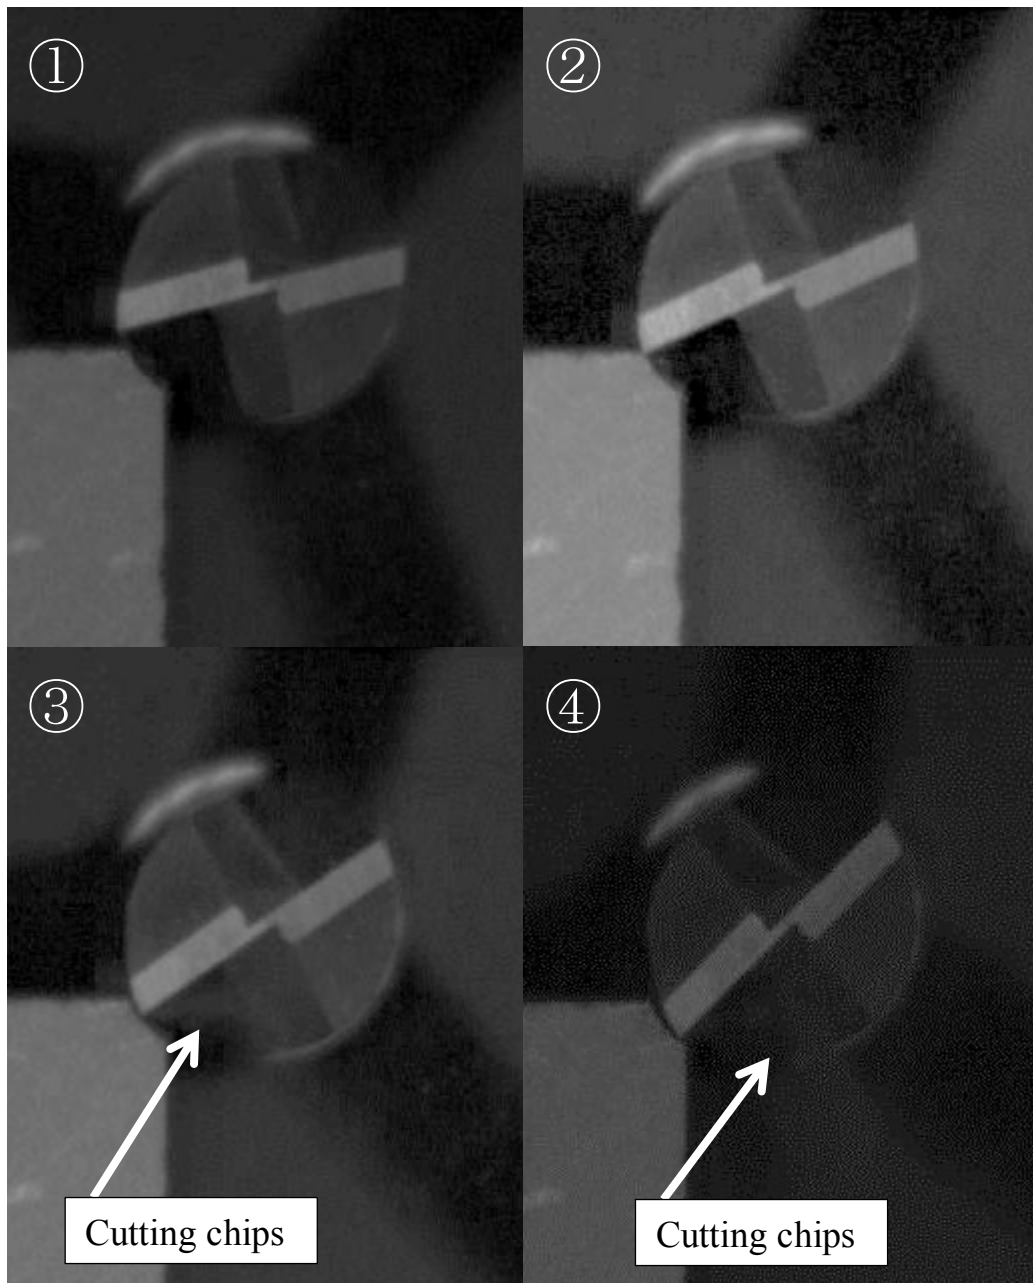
Frame-by-frame image of CFRP milling of bottom angle view (Down cut method)
